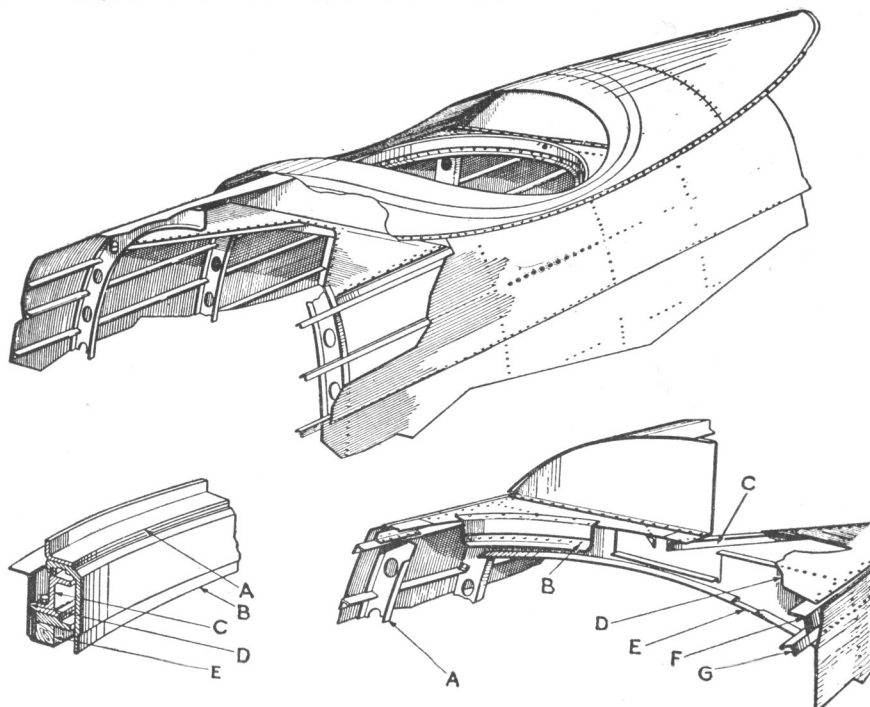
Avro Lancaster mid-upper turret mounting. The lower left-hand sketch gives a sectional view through a turret ring, showing cupola attachment (A); rotating ring (B); fixed ring (C); turret mounting ring (D); wooden packing ring (E). The lower right detail sketch shows fuselage former (A); turret mounting ring (B); stiffening angle (C); deck plate (D); rear cross member (E); longeron (F); stringer (G).
